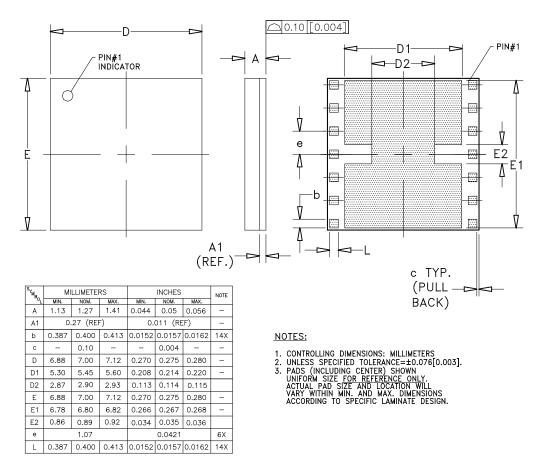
Package Outline - 14 Pin 7 mm x 7 mm x 1.3 mm Surface Mount Module
